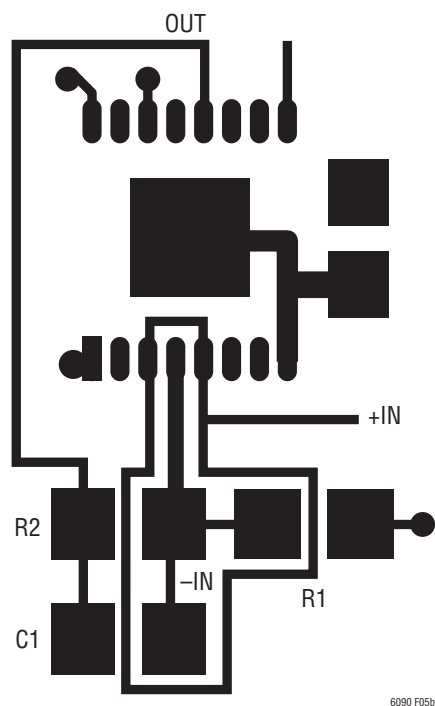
TSSOP Package PCB Layout with Guard Ring
